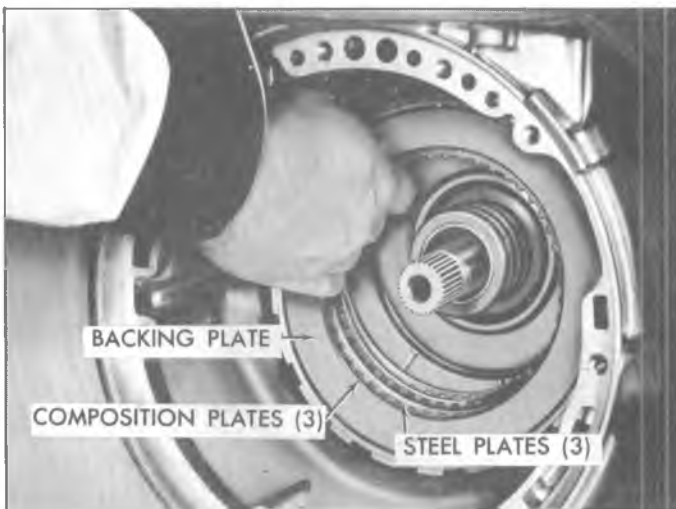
T—Removing Intermediate Backing Plate and Clutch Plates
